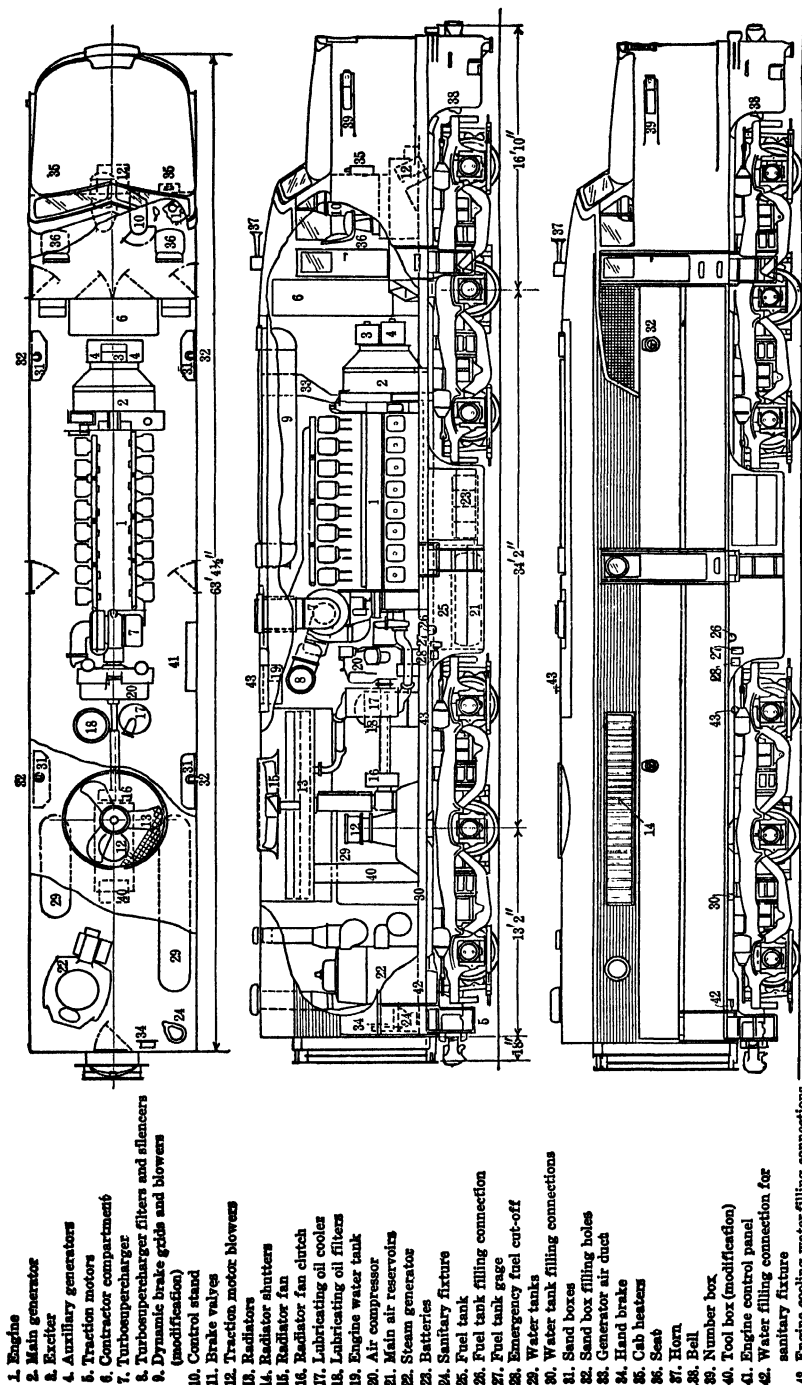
Supercharged 16-cylinder road locomotive. (Courtesy of American Locomotive Co.)
